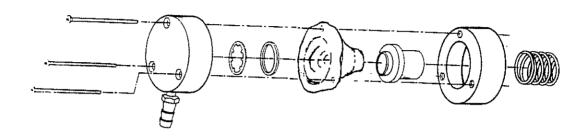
OXYGEN INPUT VALVE ASSEMBLY
